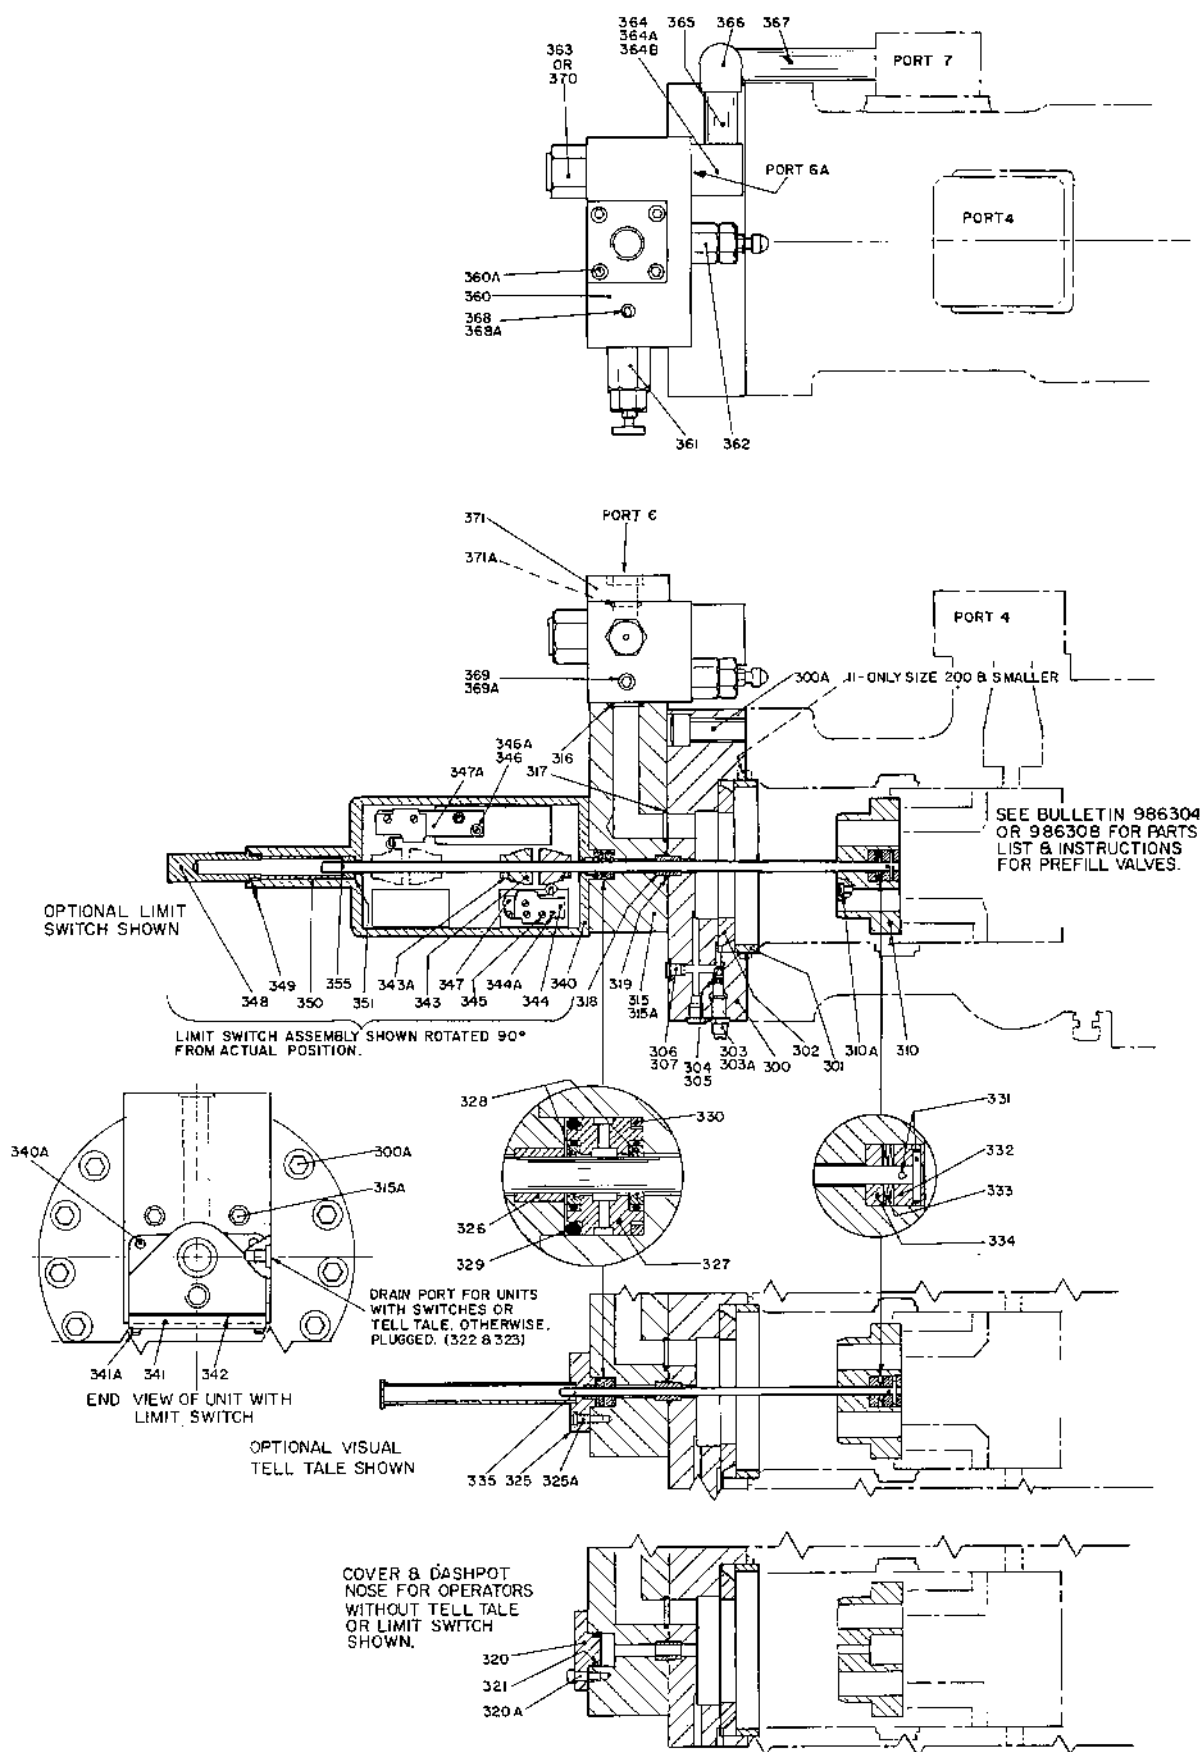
Parts Drawing. Modular Resistance Type Operator. DS-986331. (516666)
